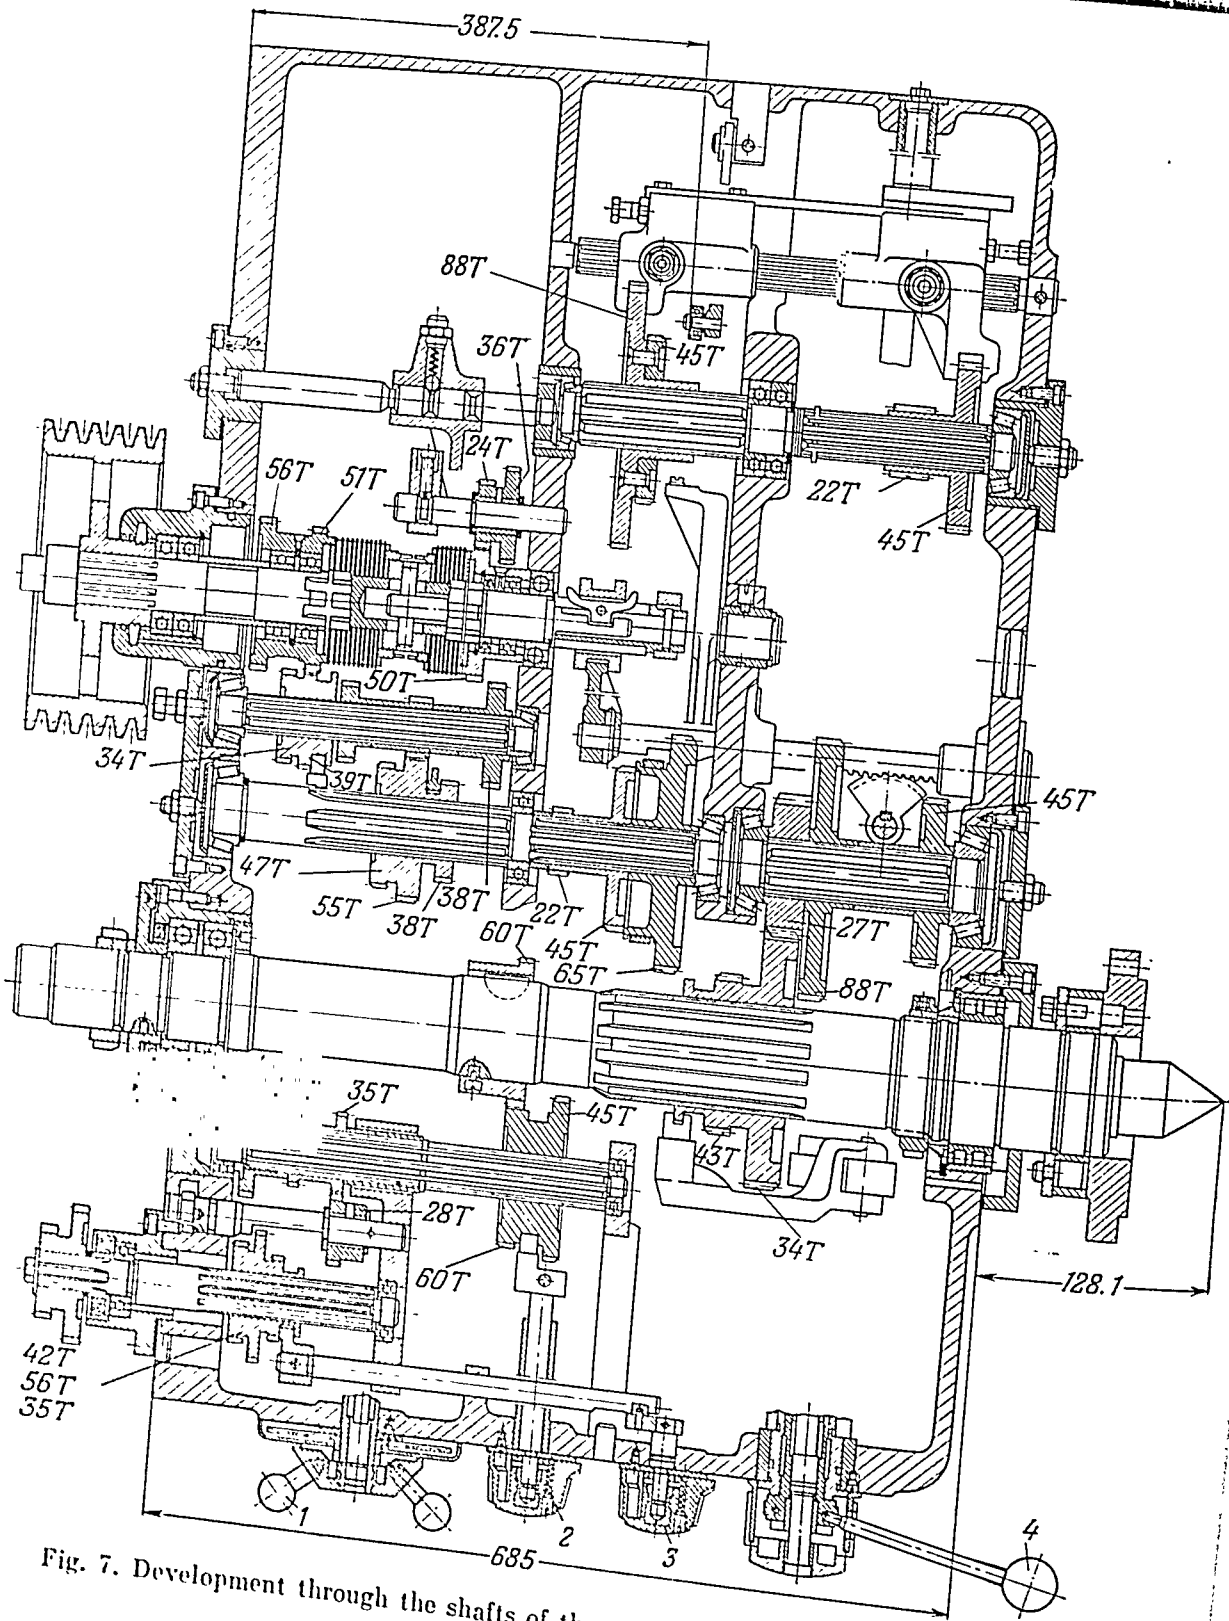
Development through the shafts of the speed gearbox on the model 1K62 engine lathe
